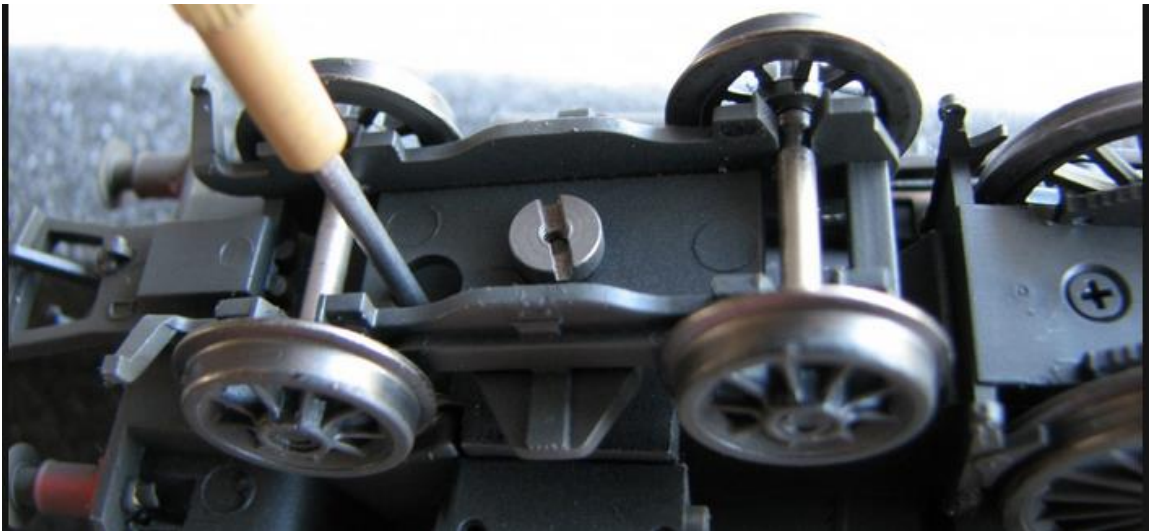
Body removal is two screws. The front is accessed through the large hole in the bogie. To prevent the screw disappearing, put a small blob of blu-tack on the end of the screwdriver, it saves hours crawling round the carpet. How do I know.....
